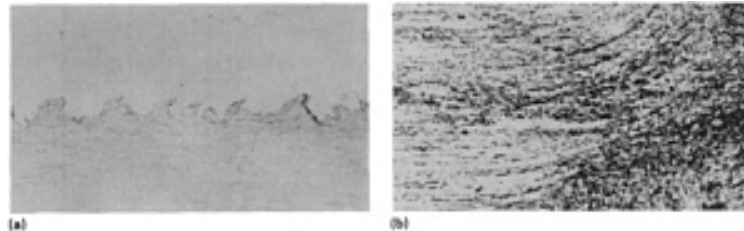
PHOTOMICROGRAPHS OF WELD INTERFACE CROSS SECTIONS OF SELECTED ULTRASONICALLY WELDED MOLYBDENUM ALLOYS. (A) 0.13 MM (0.005 IN.) THICK NICKEL JOINED TO 0.51 MM (0.02 IN.) THICK MOLYBDENUM. 200 \times . (B) TWO PIECES OF 0.20 MM (0.008 IN.) THICK ARC CAST MOLYBDENUM WELDED TOGETHER. 140 \times
